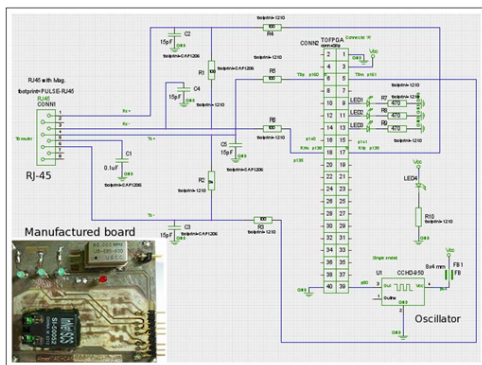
Schematic diagram for the Ethernet extension module and the manufactured board on the lower left corner
